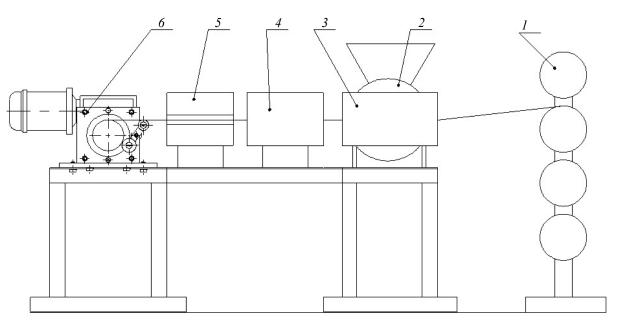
Scheme of technological line for winding cylindrical and curved products: 1 - creel; 2 - extruder; 3 - impregnator head; 4 - cold box; 5 - IR heater; 6 - coiler
